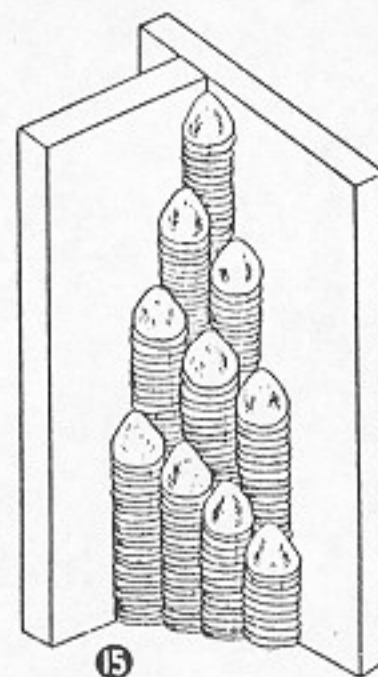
Multiple beads are used in welding up on heavy fillets.
